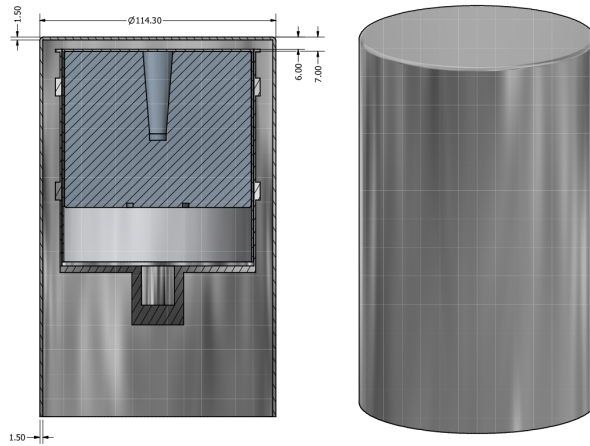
Drawing of the inner (left) and outer (right) view of the cryostat.
